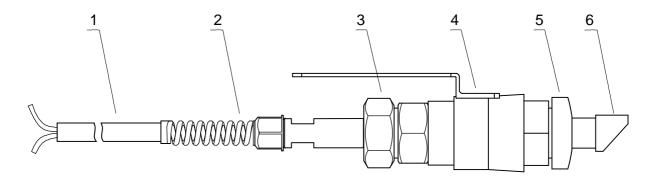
of Construction Drawing of W211 Insertion type Transducer
